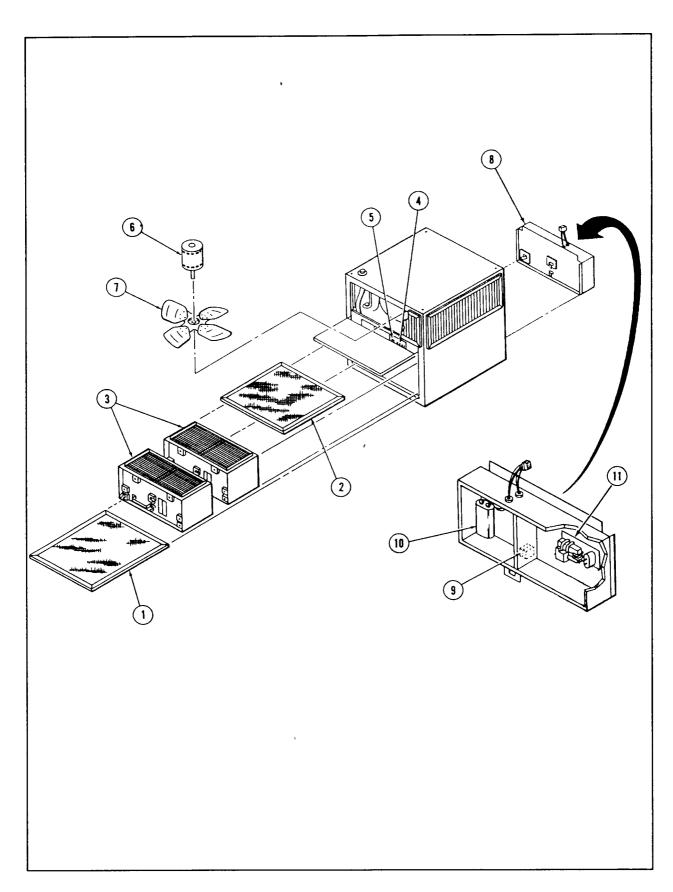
EXPLODED VIEW OF F62B ELECTRONIC AIR CLEANER
